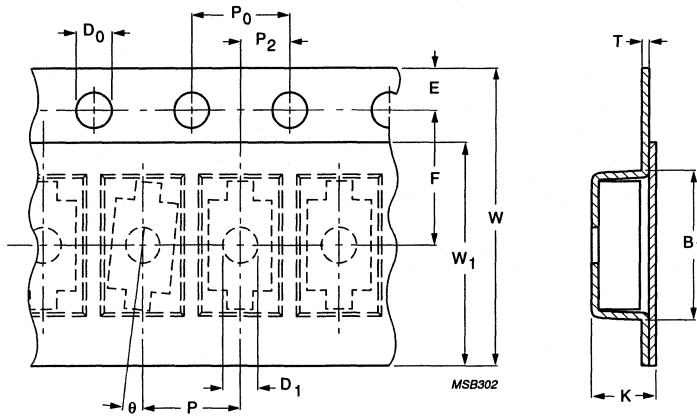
Specification for 8 mm tape (SOD80, SOD80C, SOD87 and SOD110).
